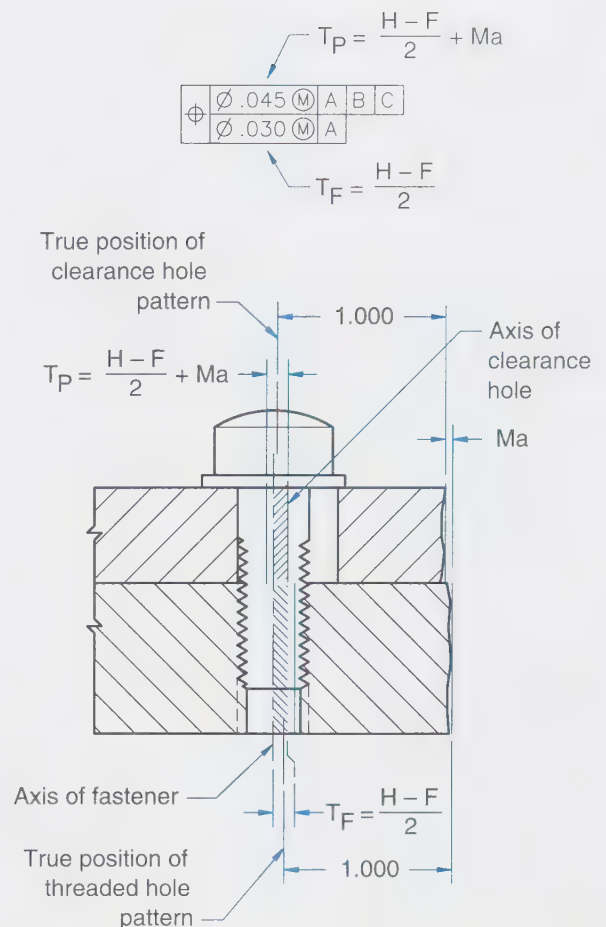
Composite position tolerances may be used for fixed fastener conditions to allow relative part movement as was explained for floating fastener applications.
